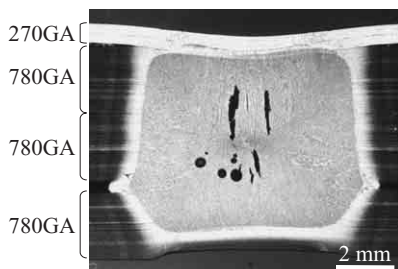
Cross sections of four sheets welded joints by intelligent spot welding
